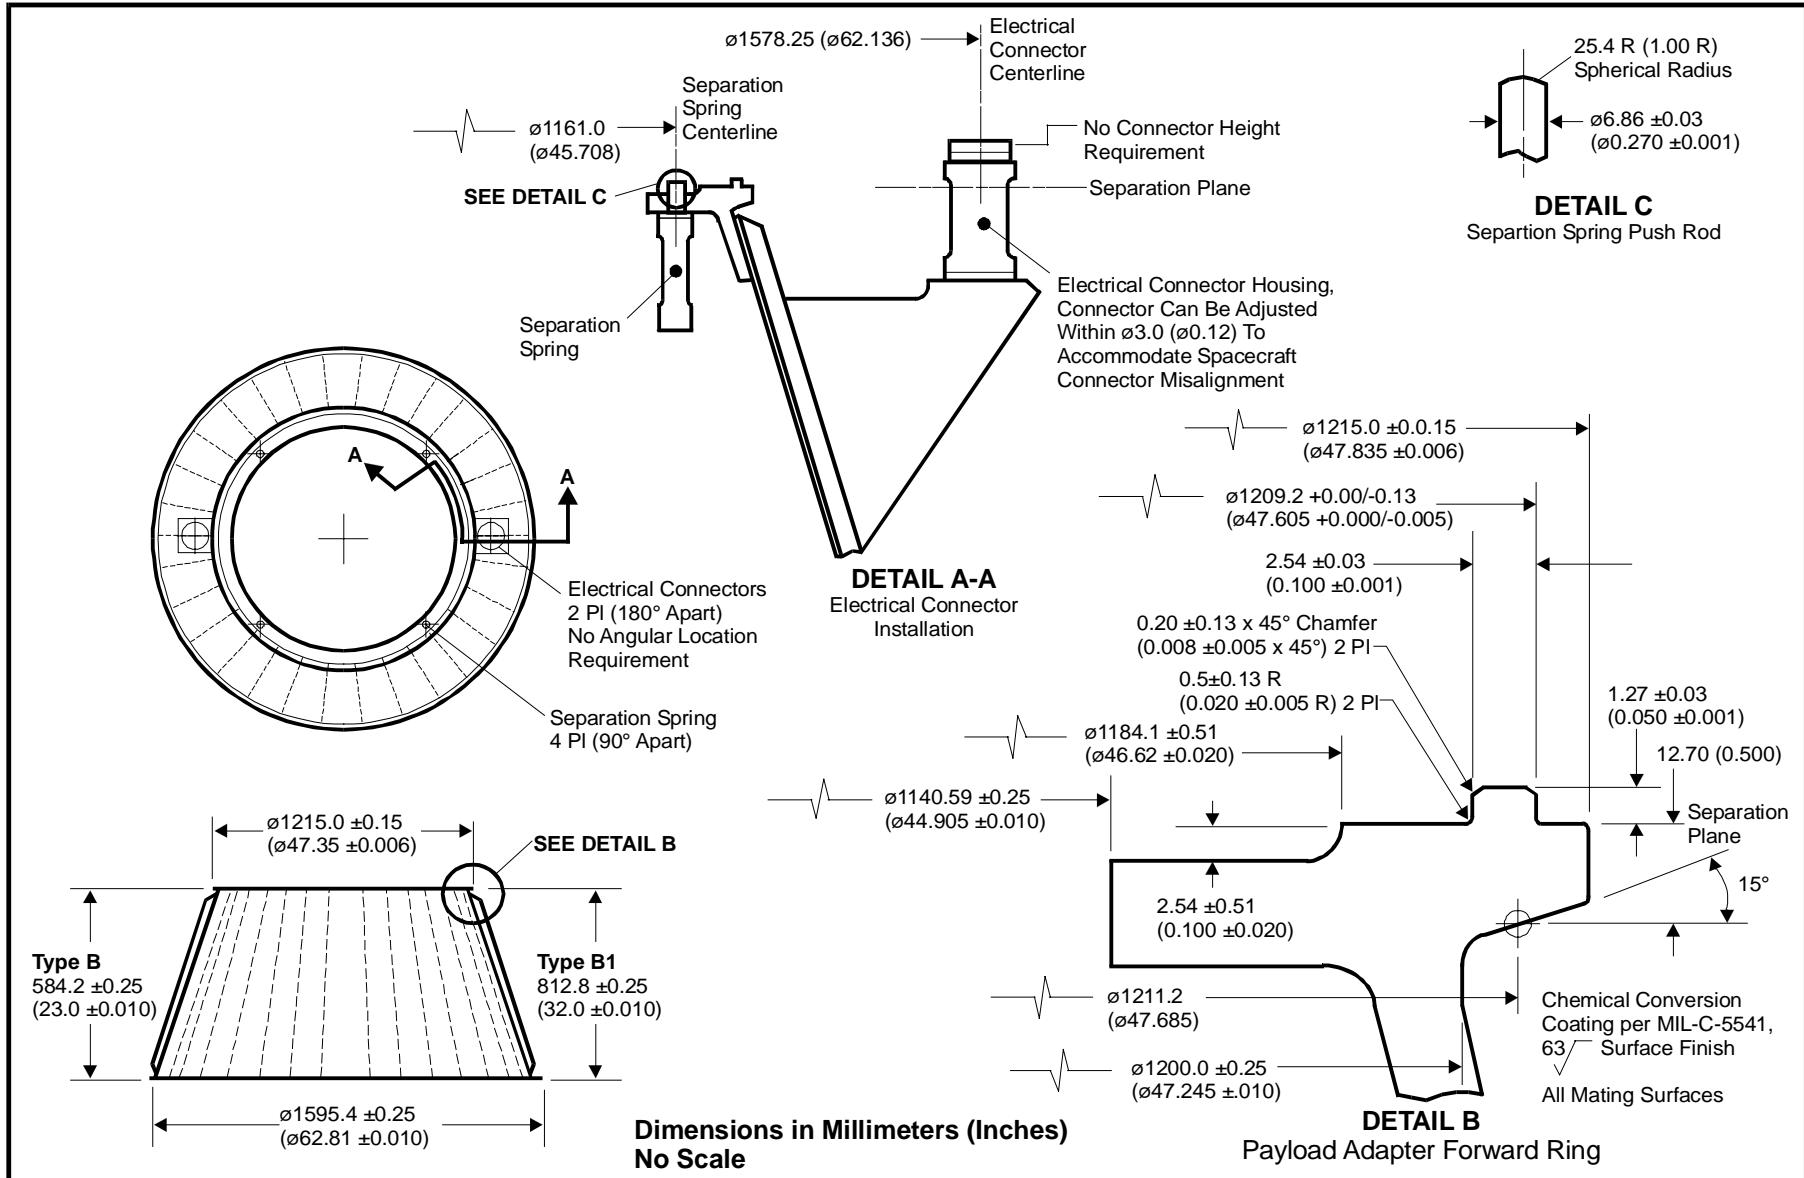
Type B/B1 Payload Adapter Mechanical Interfaces
